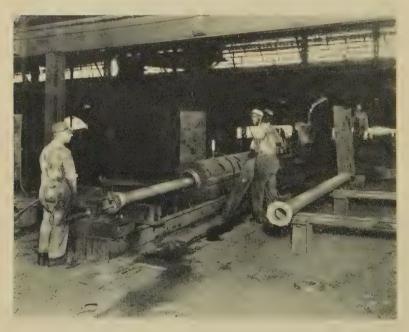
Withdrawing Pipe from Centrifugal Mould
